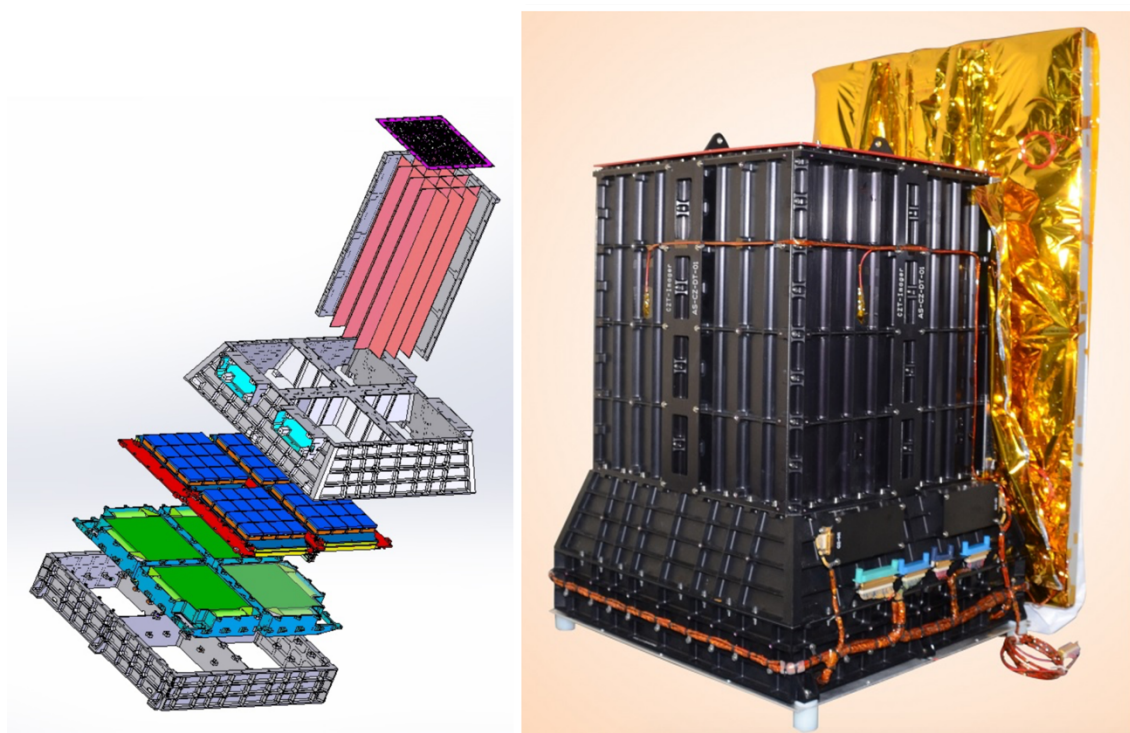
Exploded view of CZTI on left and a picture of the fully assembled CZTI before being integrated with the spacecraft.
